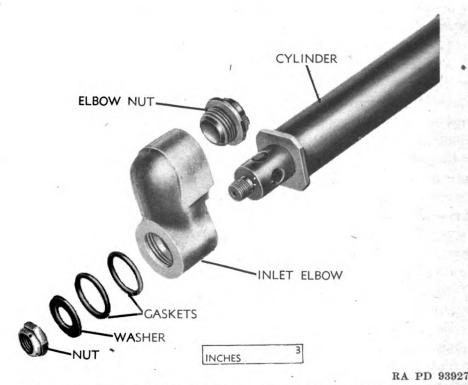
20-mm hydraulic charger M5-Parts of inlet elbow.
